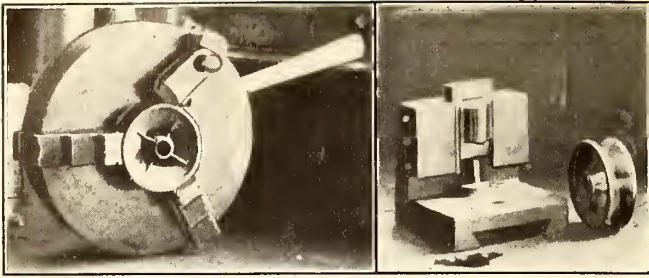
CHUCK WITH ONE LOOSE JAW; FIG. 2—REVERSIBLE TURNING TOOL
